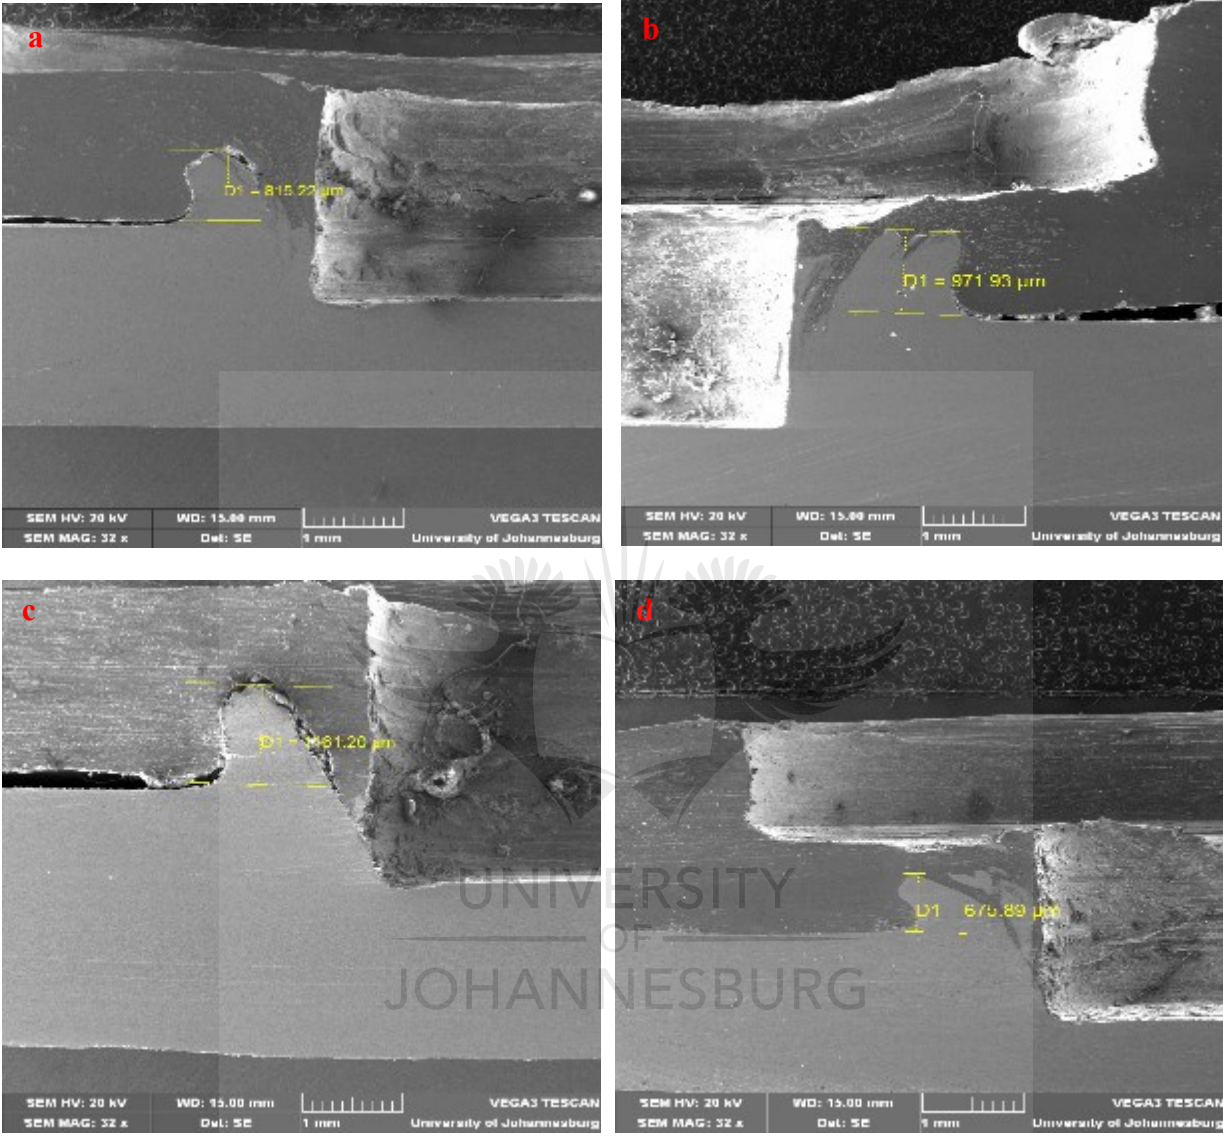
Copper ring length of the spot weld produced: (a) 800 rpm, 0.5 mm, (b) 800 rpm, 1 mm , (c) 1200 rpm, 0.5 mm and (d) 1200 rpm, 1mm using flat pin and shoulder tool
